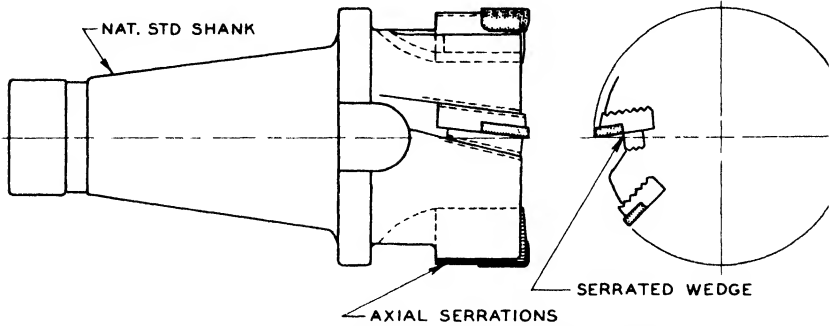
The Goddard Shank-Type End Mill with Inserted Tipped Blades
